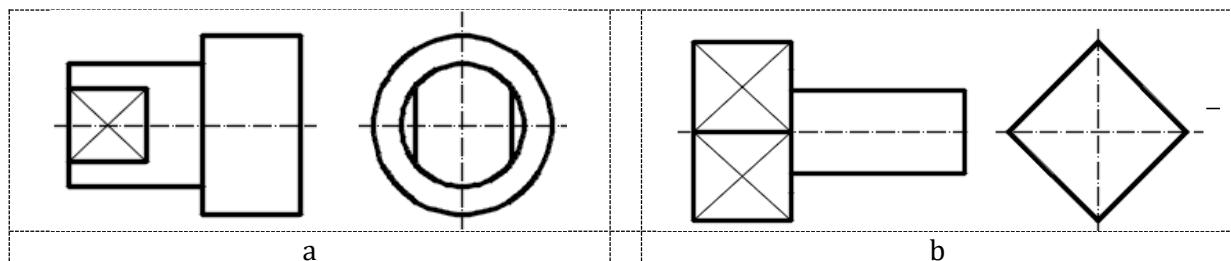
Stage of active experimentation - full cylindrical parts with plane surfaces
